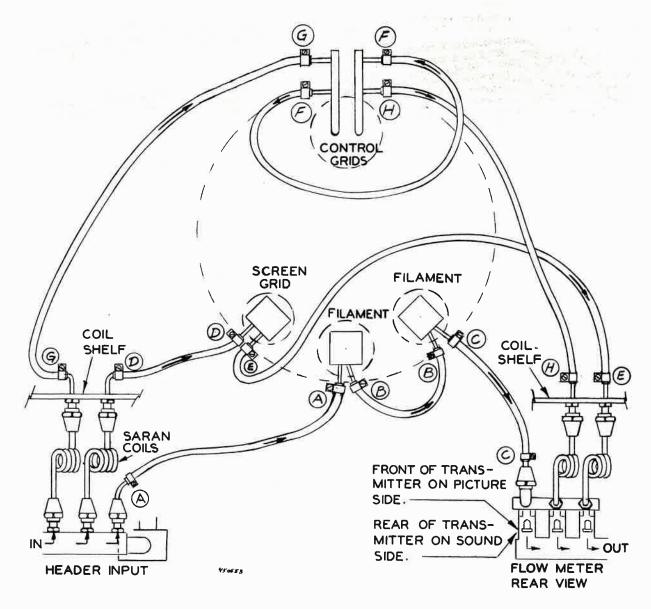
Type 8D21 Tube and Mounting Plate Assembly
